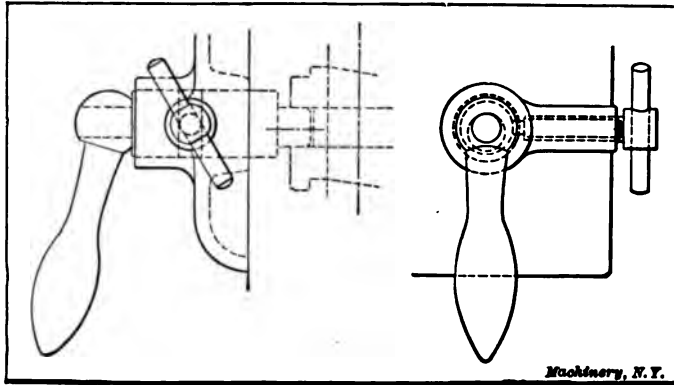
Clamping Screw with End entering Groove for Clamping Stud
